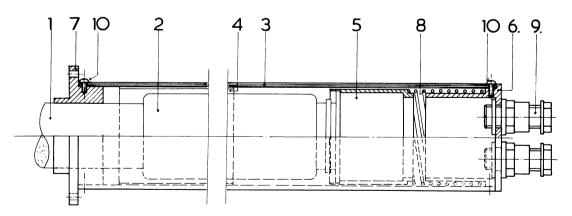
Example of plastic housing for 2 in. photomultiplier tube, spring-loaded onto the light guide. 1. Light guide; 2. Photomultiplier; 3. Outer cylinder; 4. Mu-metal screen; 5. Moulded electrical assembly; 6. Back cover; 7. Front-end clamp; 8. Spring; 9. Cable clamps; 10. Securing screws.
